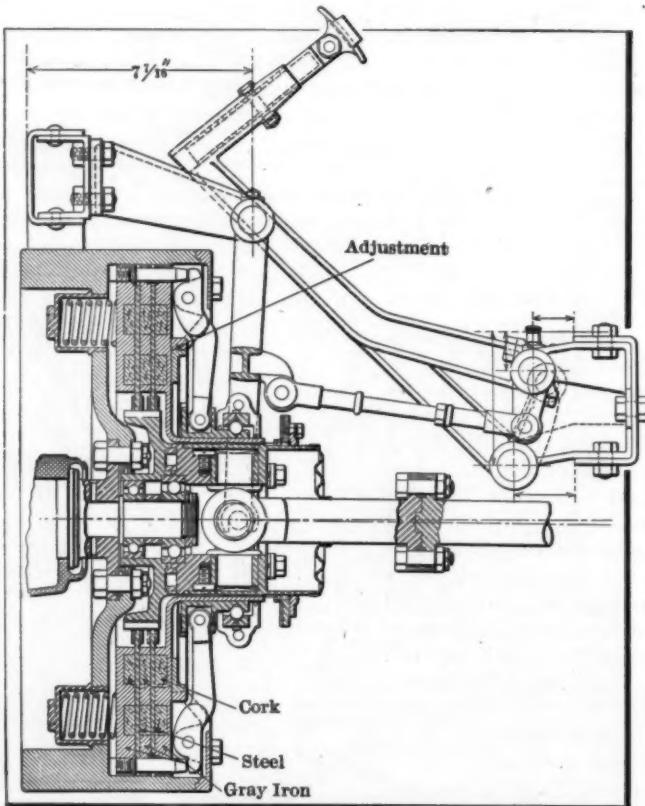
Sectional view of flywheel and clutch, illustrating multiple disc clutch, controlling mechanism and details
